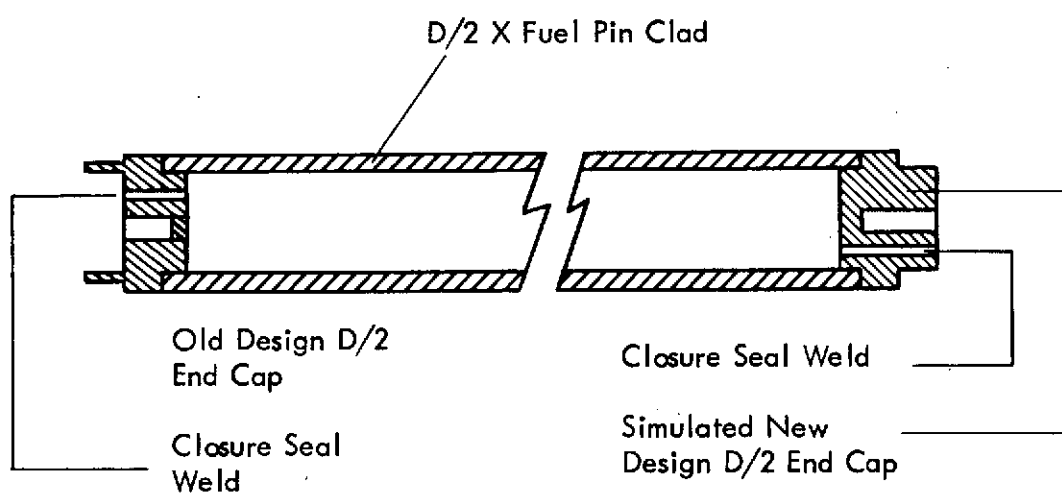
Simulated Fuel Pin for Seal Weld Test.
